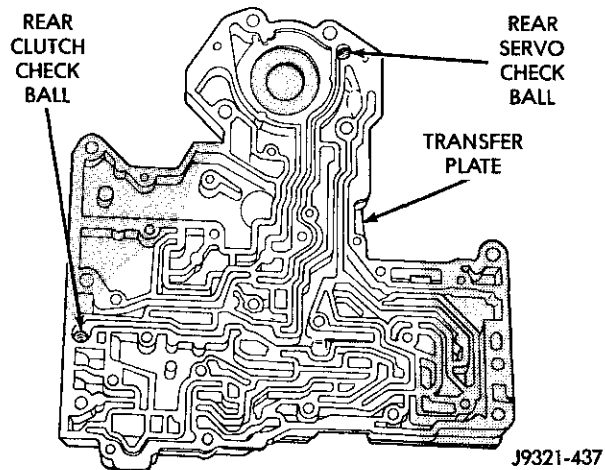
Rear Clutch And Rear Servo Check Ball Locations
